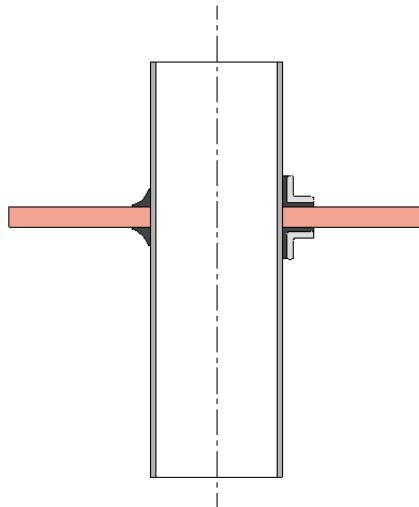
Joining through welding on the left side and joining through adhesives on the right side.
